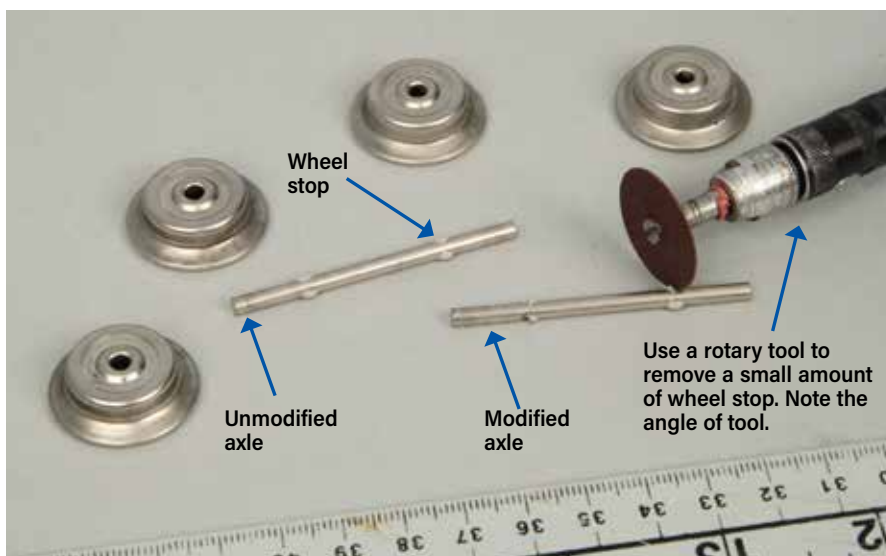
A cutoff disk in a motorized rotary tool, such as this Dremel model with a flexible shaft, makes quick work of reshaping the wheel stops.
